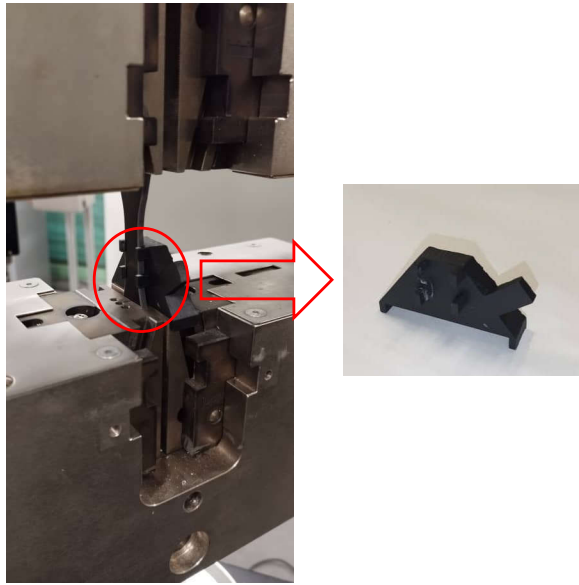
Sample setting tool to keep the dogbone sample aligned with the machine. The tool is removed before testing begins.
